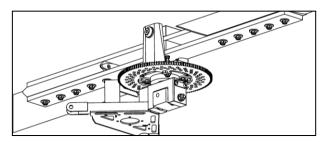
General view of the gyrocopter head with the simple rotor blade connector
